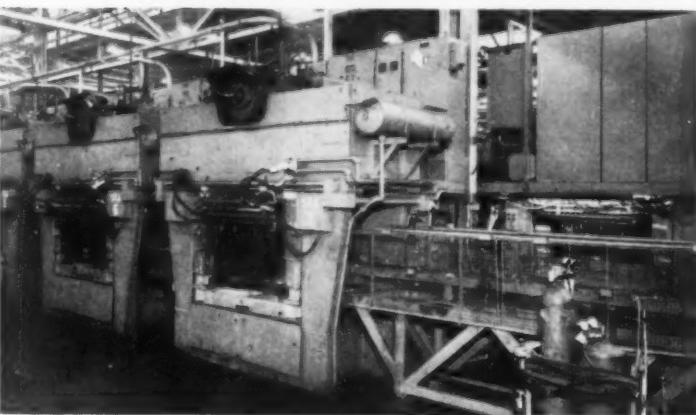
Rear view of the center pillar line shows the last three welding presses in the line. Five of these presses run automatically. Inner reinforcements are loaded into assembly at press, left. Shuttle for moving parts through presses is covered by wire screens for protection.
